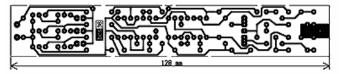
Printed circuit board of the receiver. Click to get a picture at 600 dpi Figure 2. Receiver PCB layout. Click to get 600 dpi resolution image
